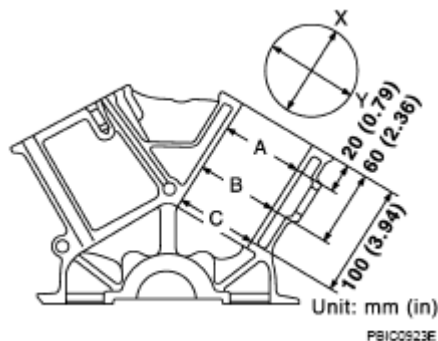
Identifying Cylinder Bore Inner Diameter Dimensions
